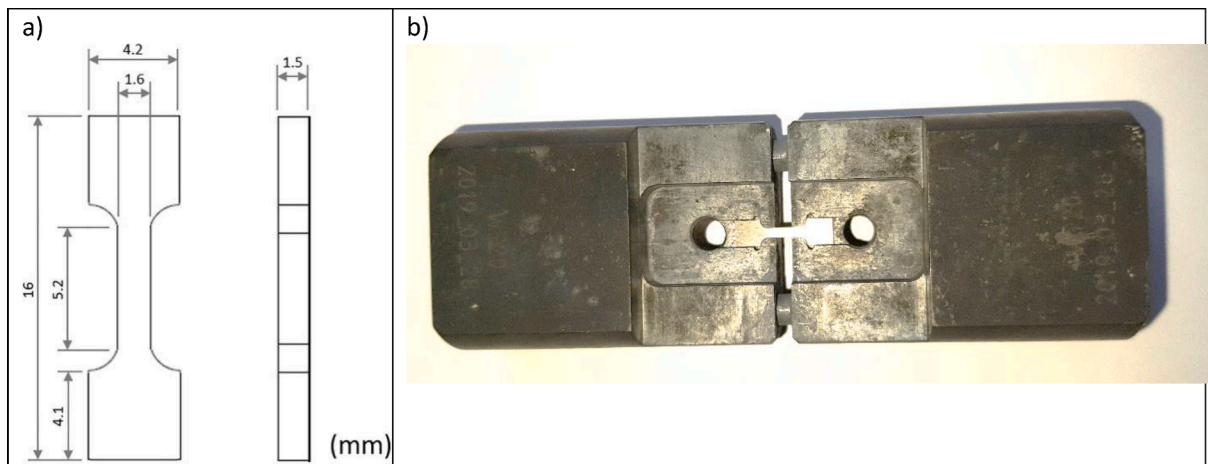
a) The drawing of the tensile specimen used to characterise IGP W (non-irradiated specimens with thickness 1.8 mm were also used). b) A specimen mounted in a special holder for tensile tests (without removable covers).
